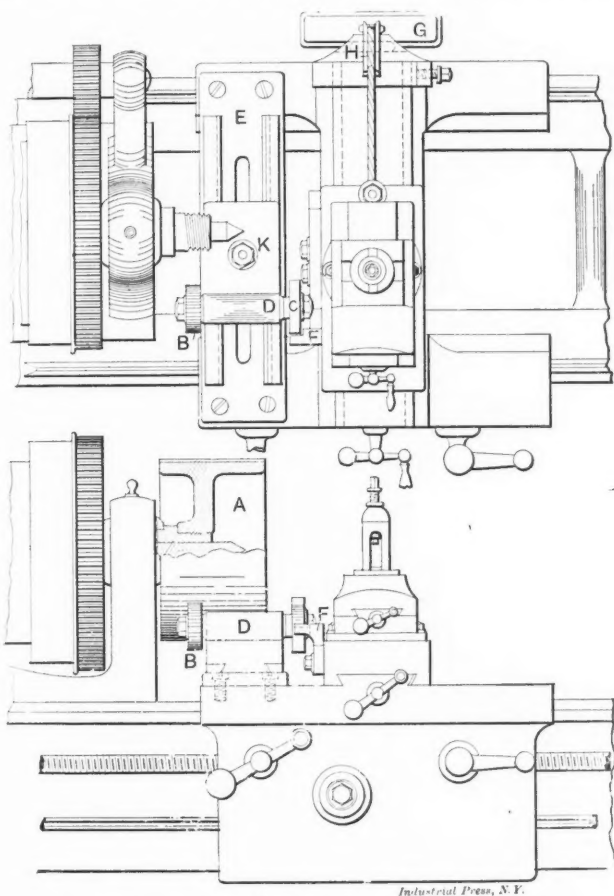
Lathe arranged for relieving Formed Milling Cutters.
